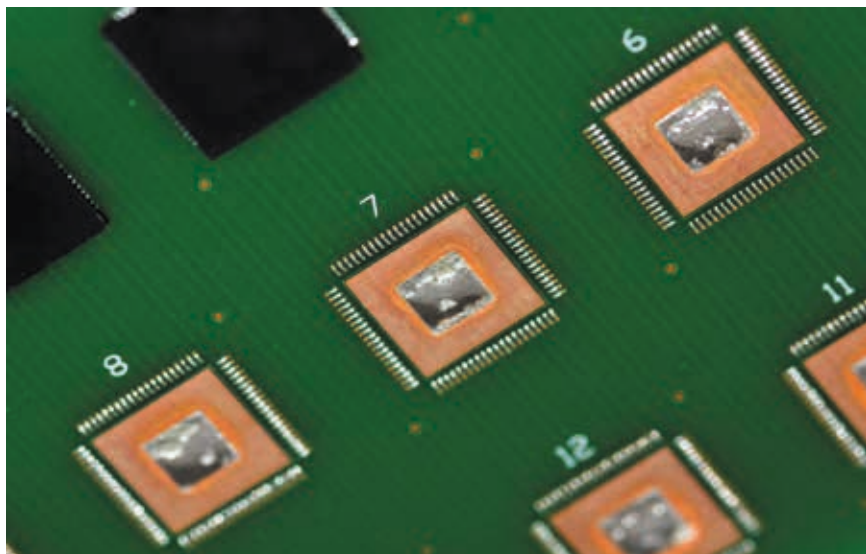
Board after reflow showing solder on both the leads and the exposed pad (bottom right) are also soldered to the QFN component, demonstrating the strenuous nature of board-level temperature cycling. QFN12x12 parts are also mounted on the board (top left).
